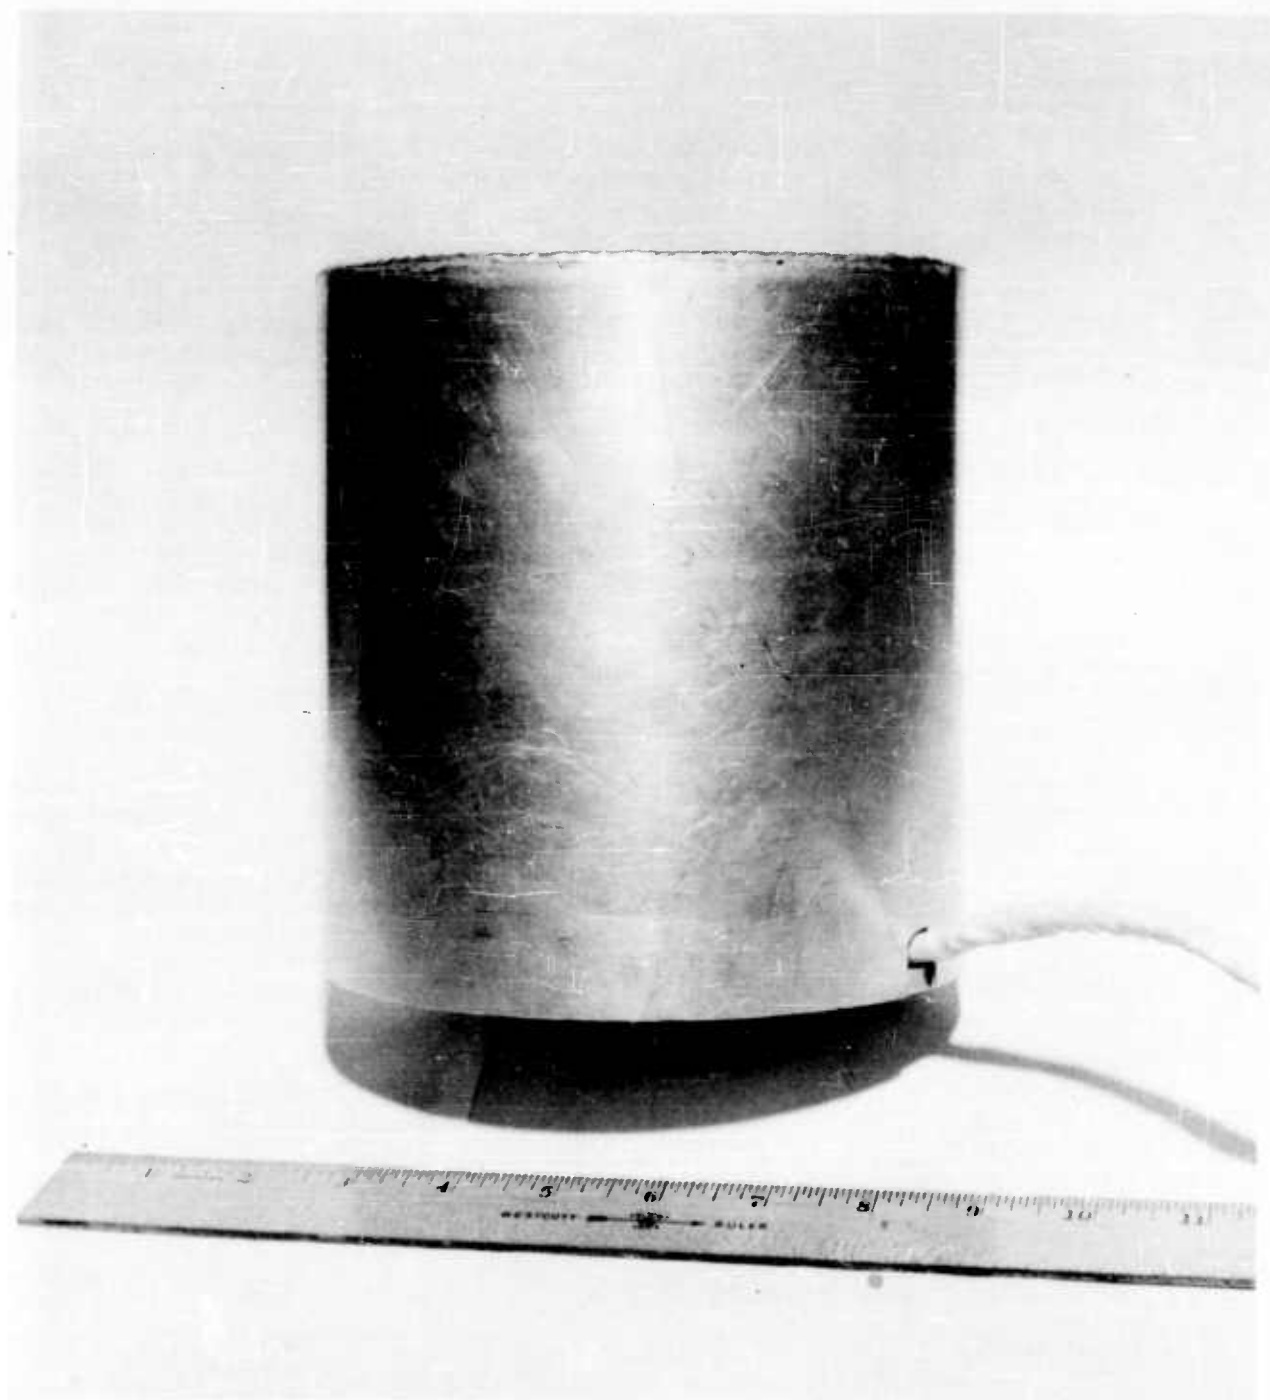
TEST FIXTURE FOR MULTIPLIER PHOTOTUBES
